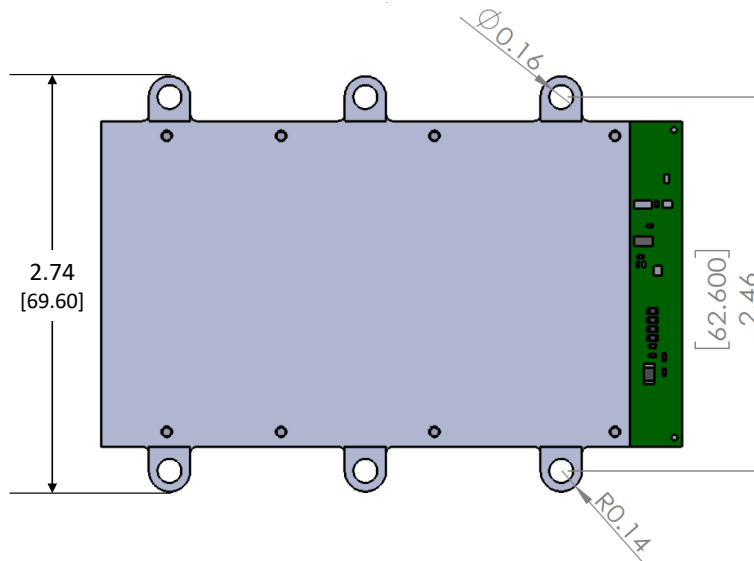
SL4200 OEM Bottom View (Dimensioned)
